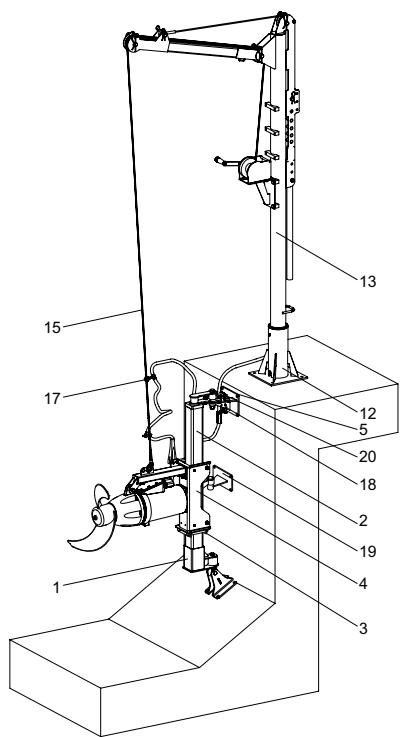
Installation drawing, SMG mixer installed on a column profile
